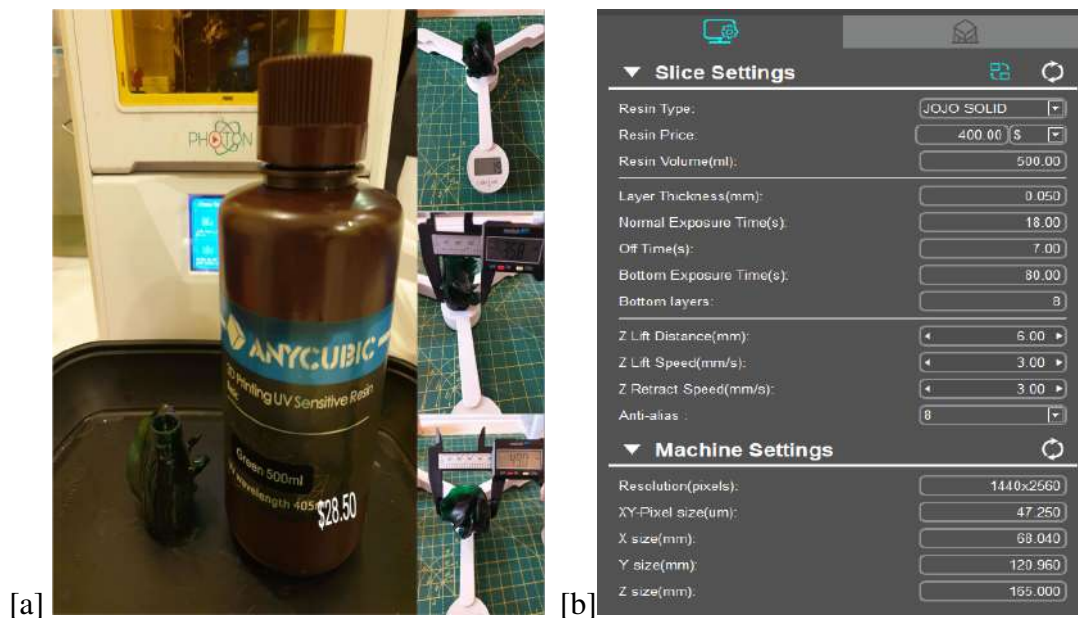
Prototype information: UV resin with 3D print dimension and weight, (b) slicer settings.
